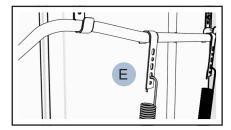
Door Spring Hooks (E) Tension Adjustment
